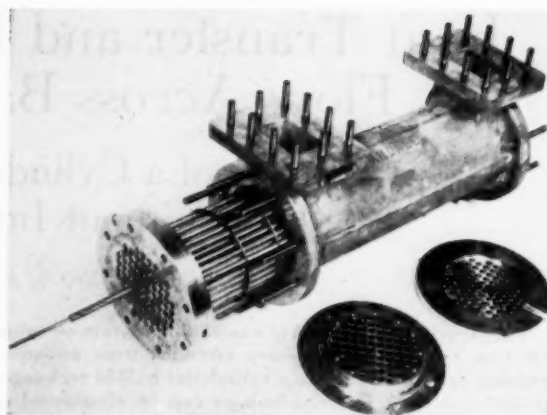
PARTIALLY ASSEMBLED EXCHANGER
